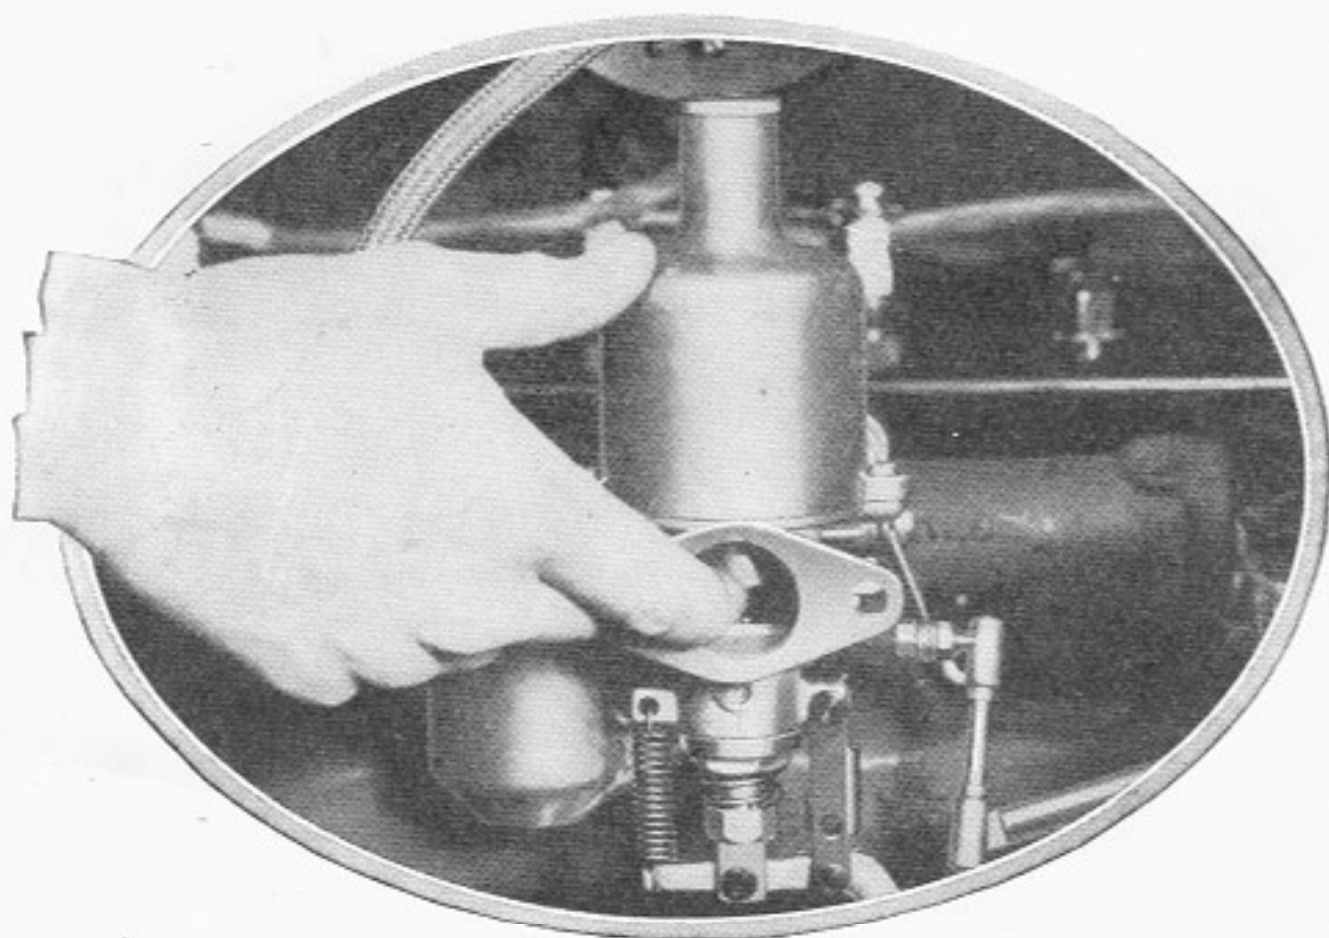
THE PISTON SHOULD MOVE QUITE FREELY ON PRESSURE BY THE FINGER
